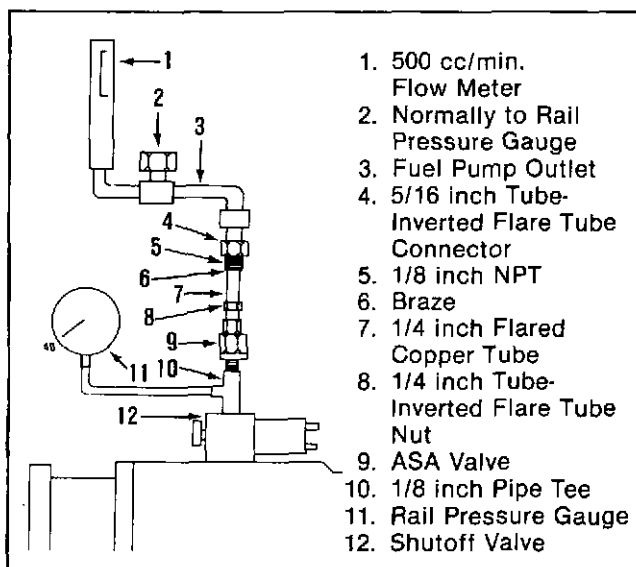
, (F5396). ASA valve installed on the fuel pump test stand.
